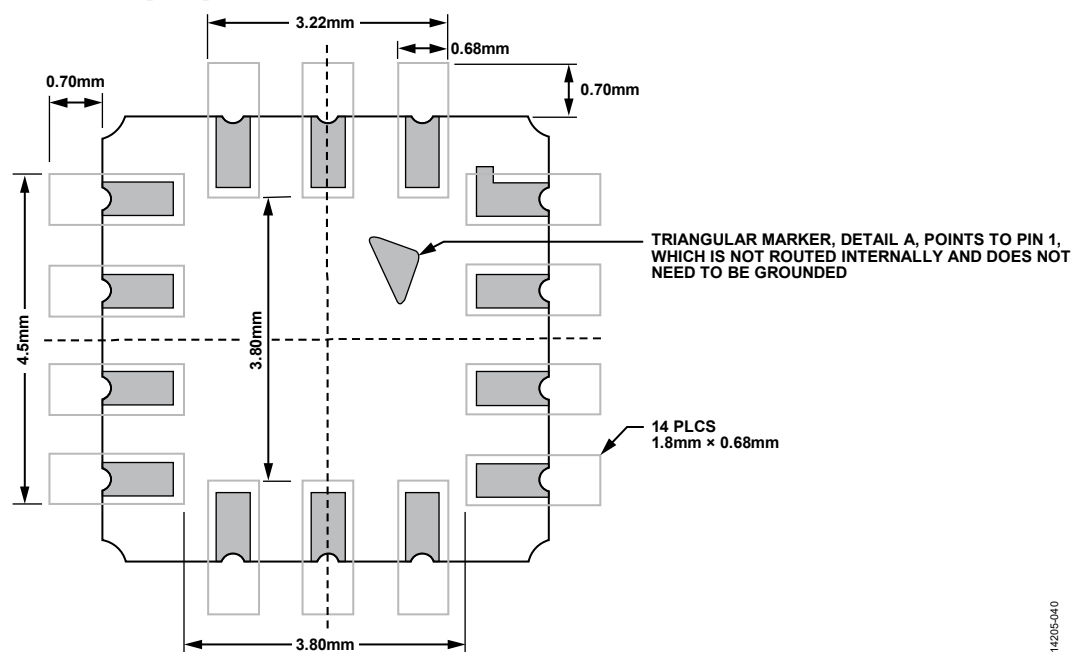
PCB Footprint Pattern and Dimensions in Millimeters
